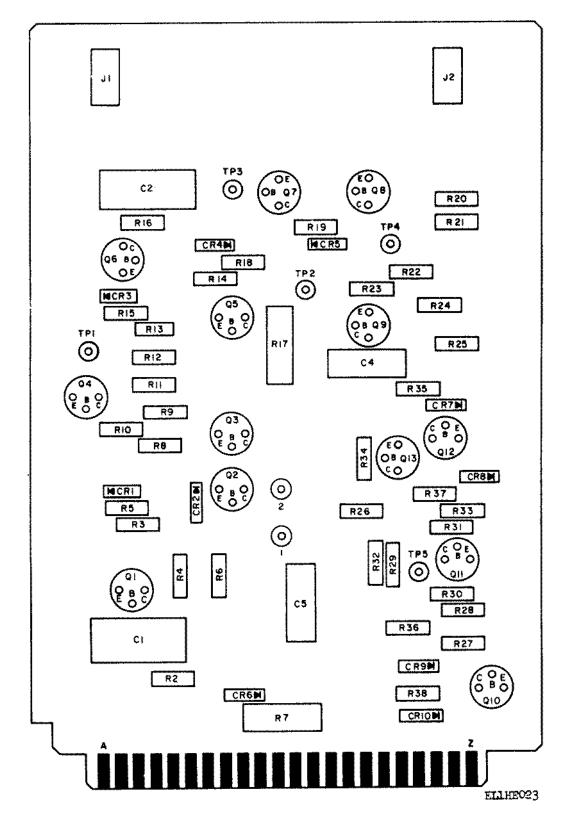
Printed-circuit card assembly A10 (PC 80034040), component location diagram.
